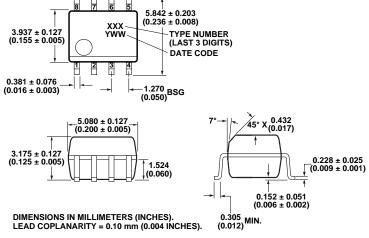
HCPL-0466 Outline Drawing (8-Pin Small Outline Package).
